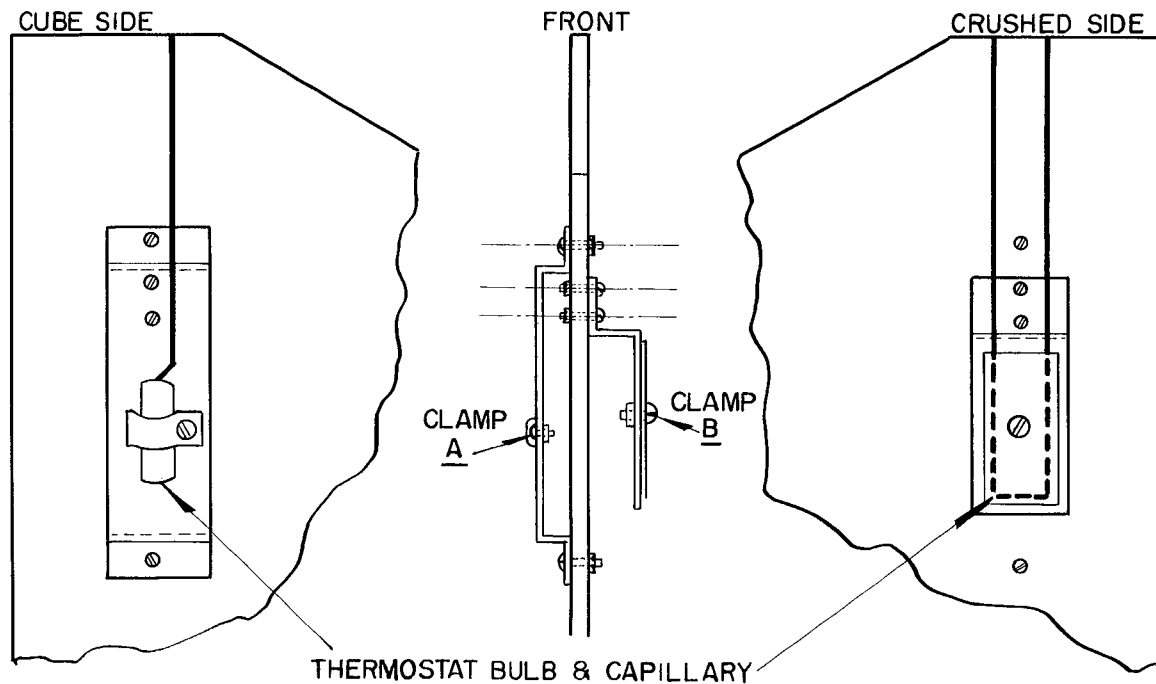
SHOWING PARTITION INSTALLED IN BIN
